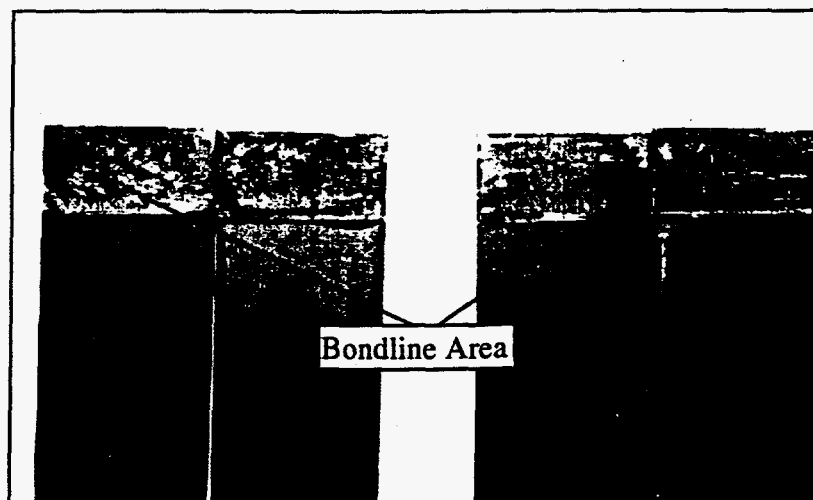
Lap shear tested coupons using the 11L paste adhesive.
